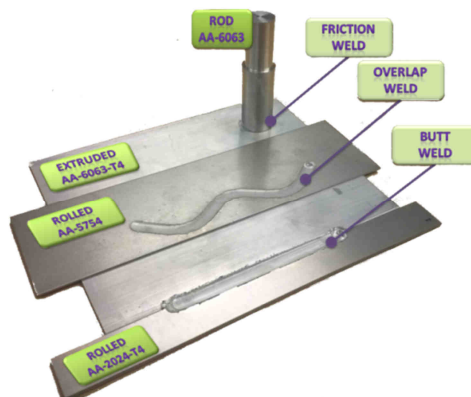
Friction Welding and FSW of a lap joint and a butt-joint, performed with a FSW-robot
